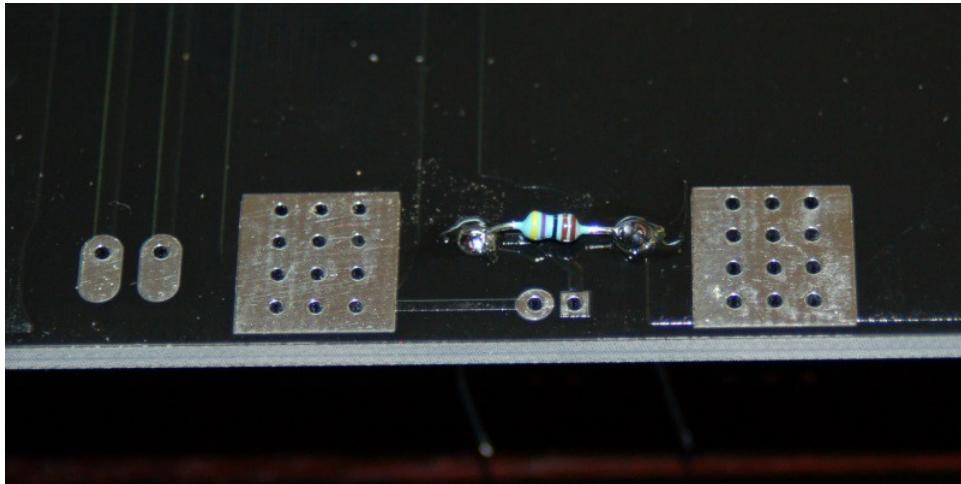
A-7: Resistor soldered to the bottom of the Onyx.
